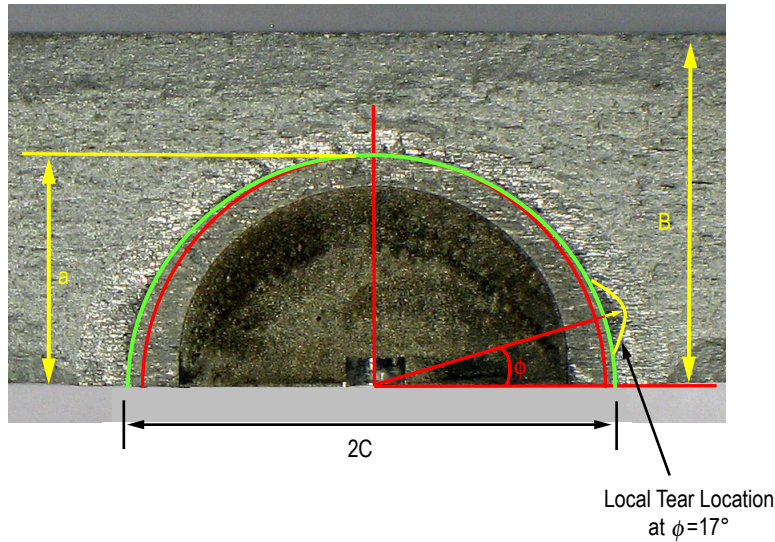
Round robin specimen fracture surface with tearing location indicated.
